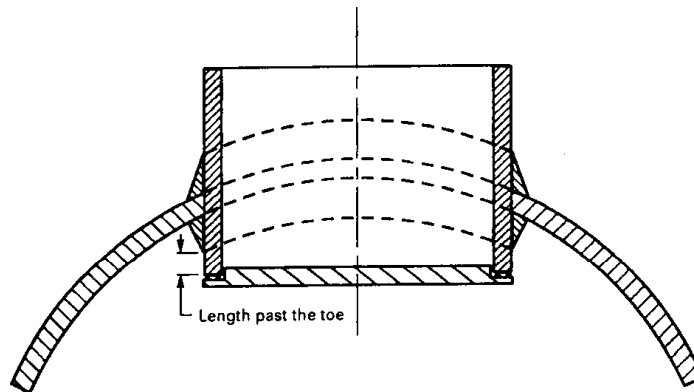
MAXIMUM INTERNAL PROJECTION OF WELDED ACCESS OR INSPECTION OPENINGS
